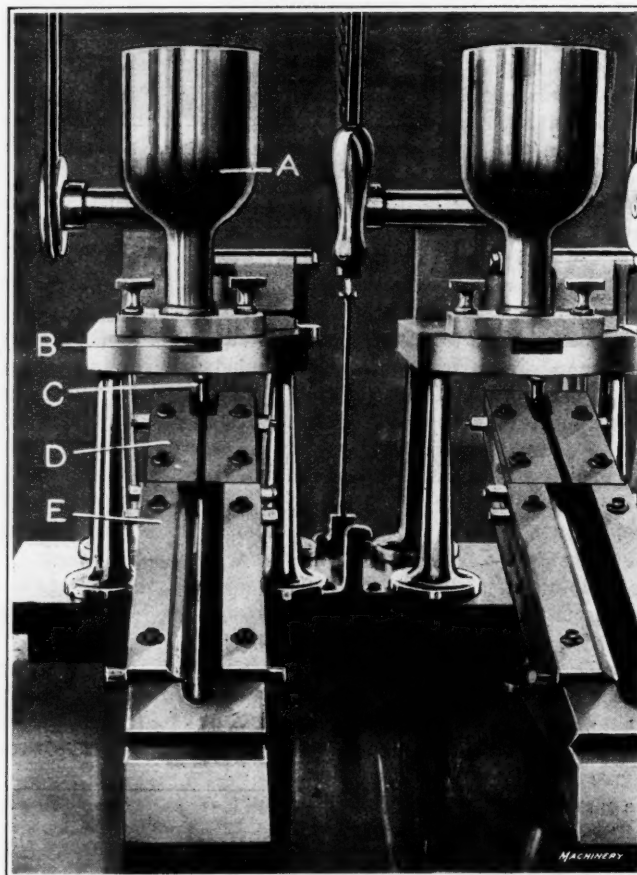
Automatic Ball Gaging Machine for inspecting Balls up to $\frac{1}{8}$ Inch Diameter
